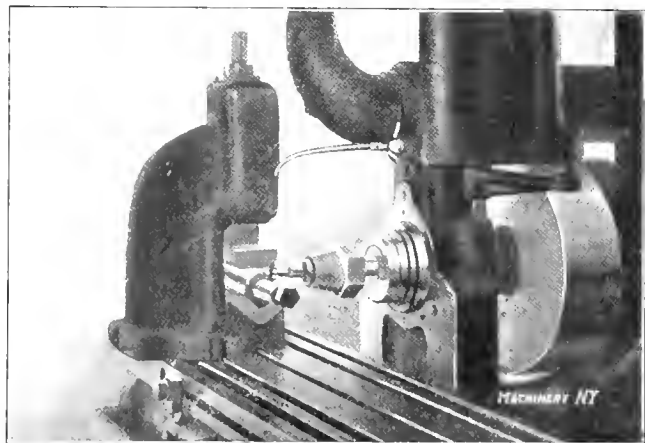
Upright V-vise for Holding Shafts which are being milled for Woodruff Keys
